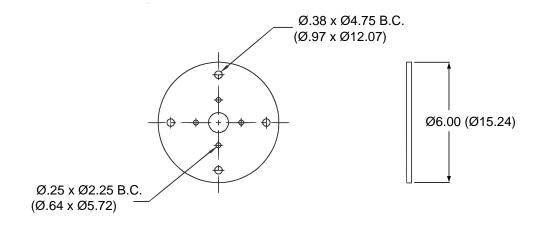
Dimensions, Mount Adapter. Dimensions in inches (mm) (CohuHD p/n 7411418-001)
